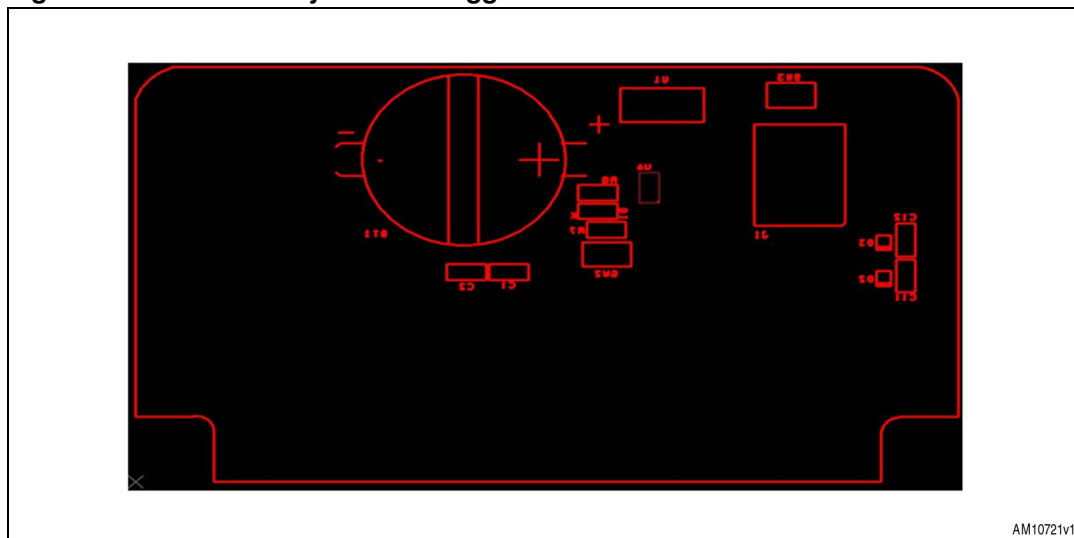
(#) and [19](#) below show the component layout to help the user locate different components/sections on the board.
